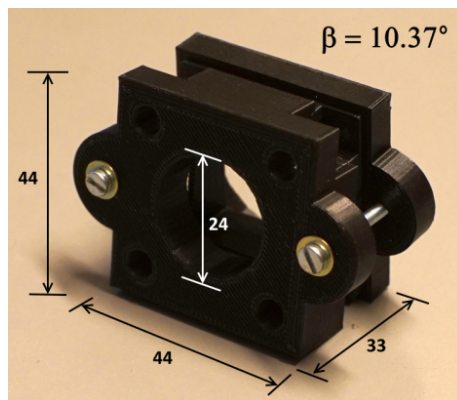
Assembled 3D printed grating holder. All measurements are in units of mm.
